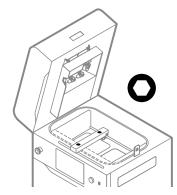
Set the Recoater and remove the screws from the Recoater cover.
